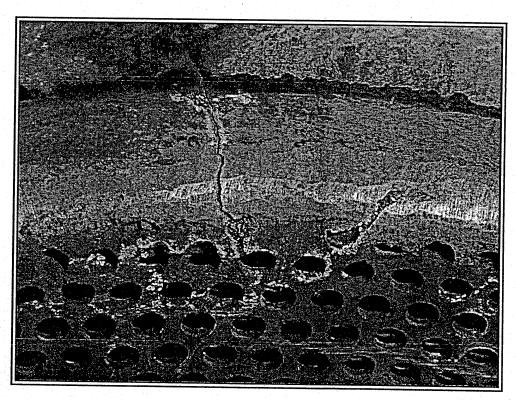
Photograph of the flange cracks in the witch's hat strainer
